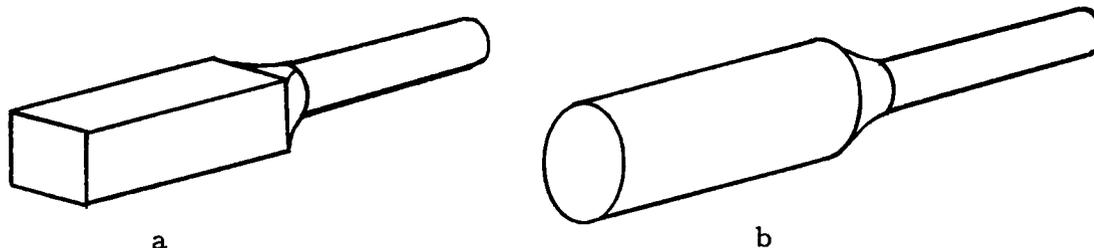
a) Hammer with cylindrical-shaped handle and rectangular-shaped head.
